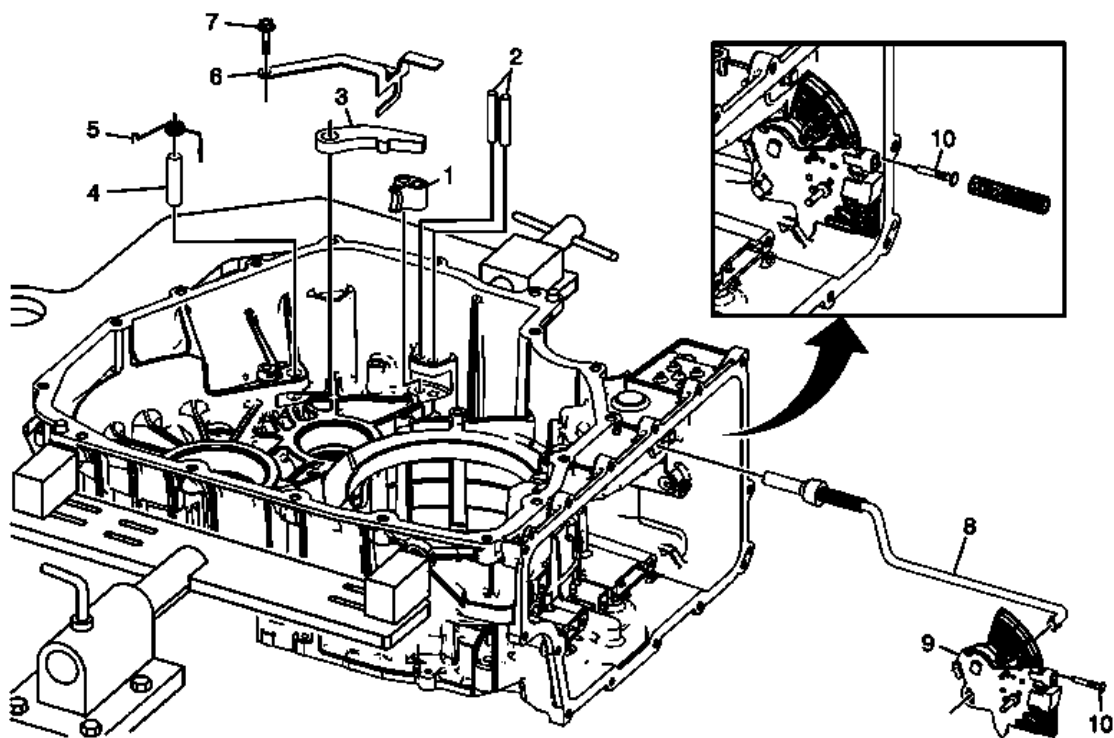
Identifying Manual Shift Detent Lever With Shaft Position Switch Assembly & Park Pawl Actuator
